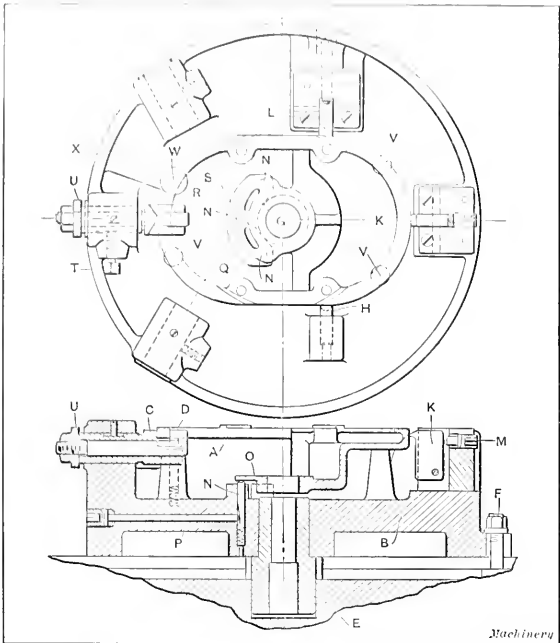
Ingenious Chucking Device for holding Odd-shaped Aluminum Casting without Distortion
